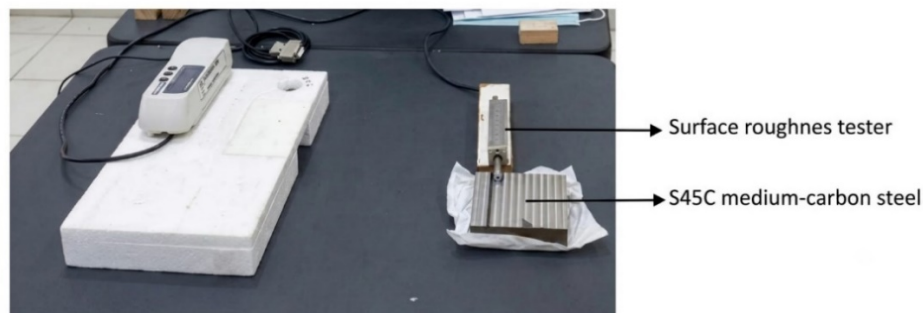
Surface roughness measurement of the machined S45C specimen using a portable surface roughness tester.
